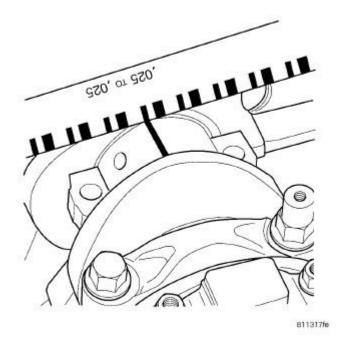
CONNECTING ROD BEARING CLEARANCE Courtesy of CHRYSLER LLC
